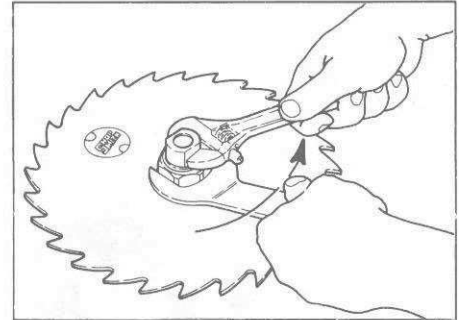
To tighten the saw blade on the arbor, keep the arbor from turning with an adjustable wrench, and turn the arbor nut counter-clockwise with the arbor wrench.
